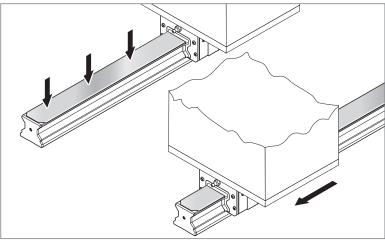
Clip on Rail Seal/push runner block back into the widened sliding section
